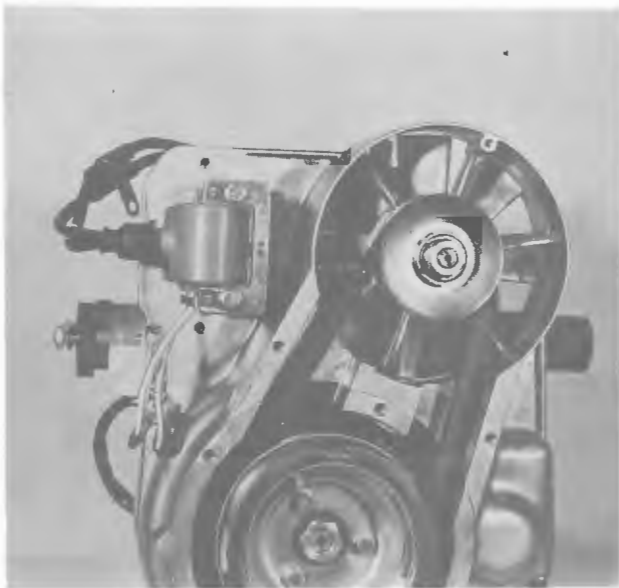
HIGH TENSION COILS INSTALLED
